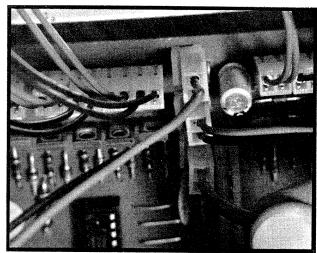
Connect Cable #6 to J4 on the Middle Driver.
